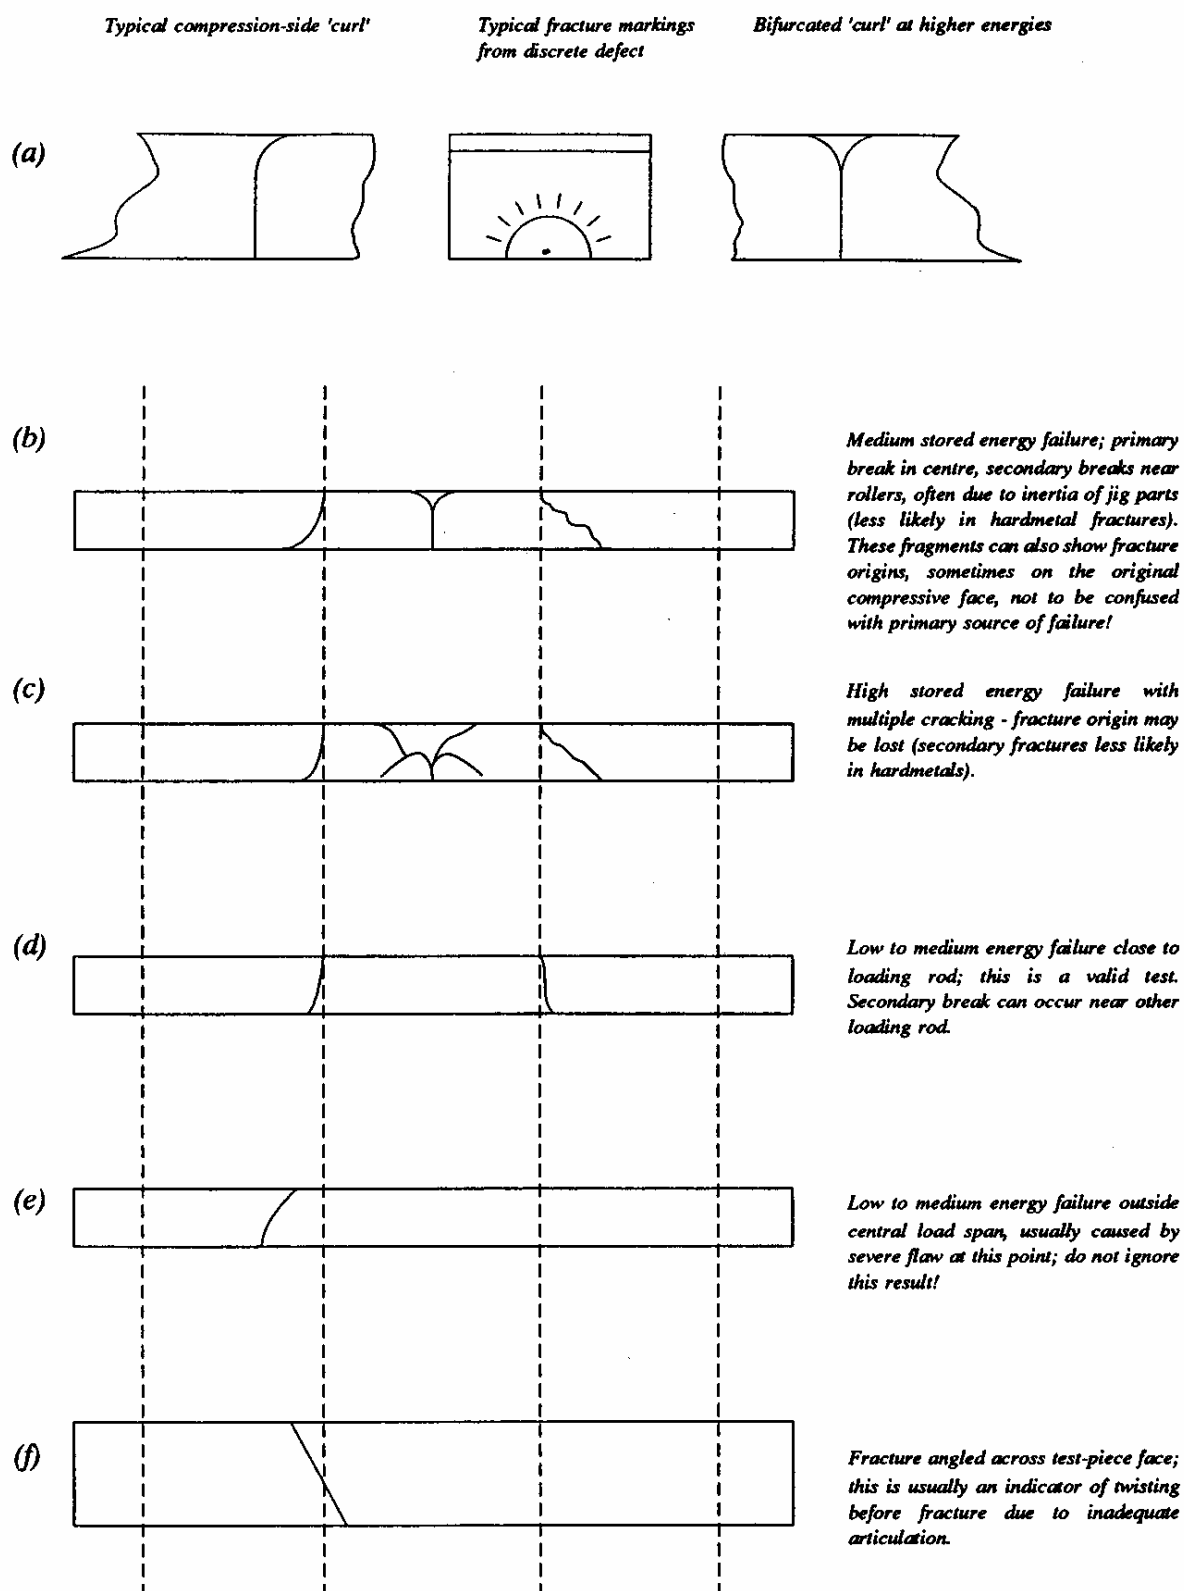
Macro-fractography of test-pieces as indicators of fracture mode and failure origin.
